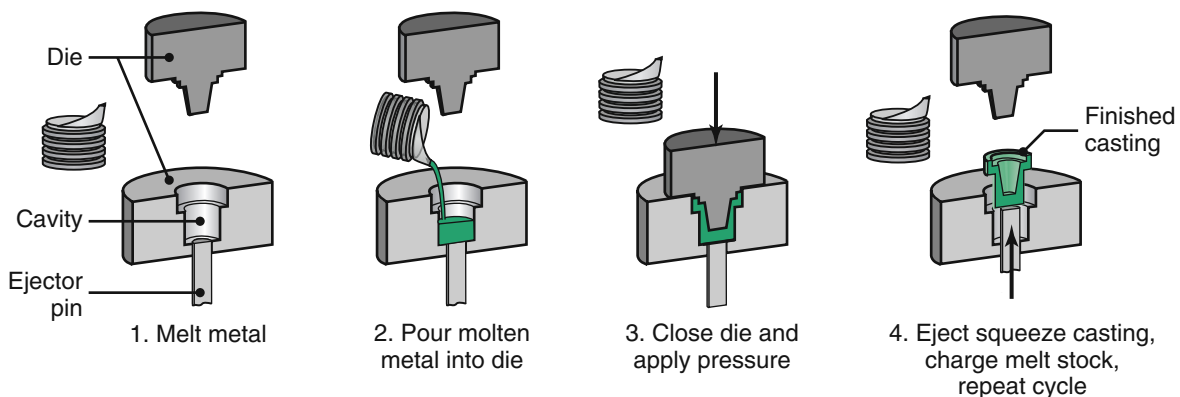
Sequence of operations in the squeeze-casting process. This process combines the advantages of casting and forging.
